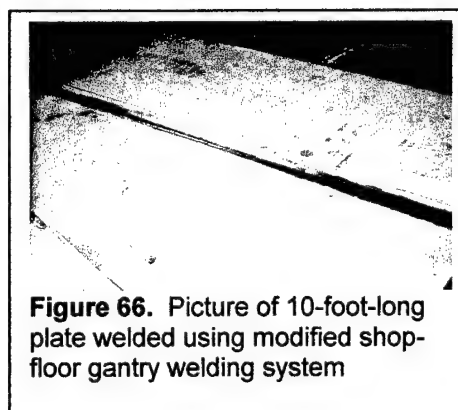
Picture of 10-foot-long plate welded using modified shop-floor gantry welding system
